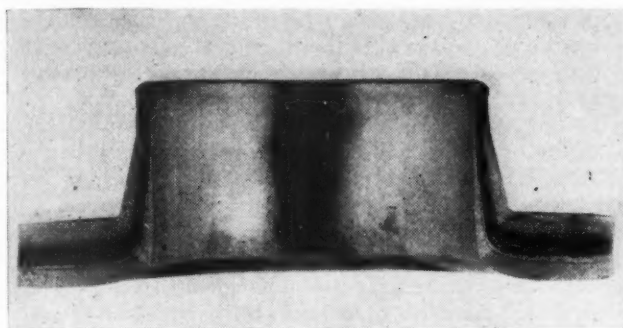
ETCHED CROSS SECTION OF TORQUE-TUBE FLANGE
